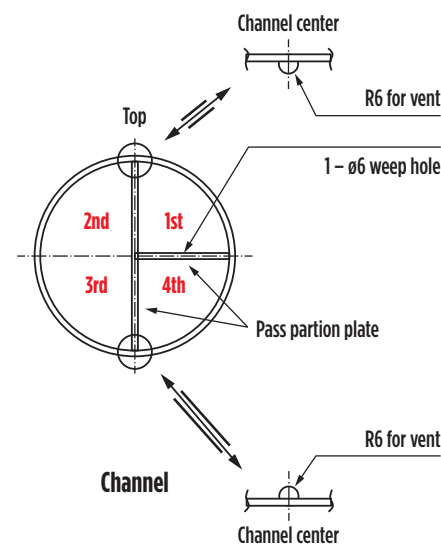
Weep holes in a four-tube-pass shell-and-tube heat exchanger.
